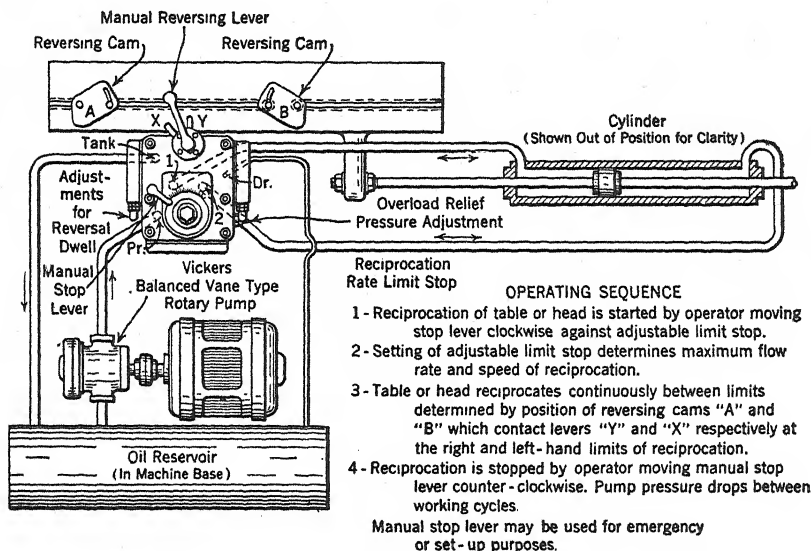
Diagram of a Typical Hydraulic Circuit as Applied to a Machine Tool in Which a Constant-Delivery Pump Is Used.
